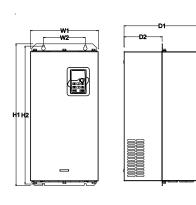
Wall installation of 660 V 250-350 kW VFDs
